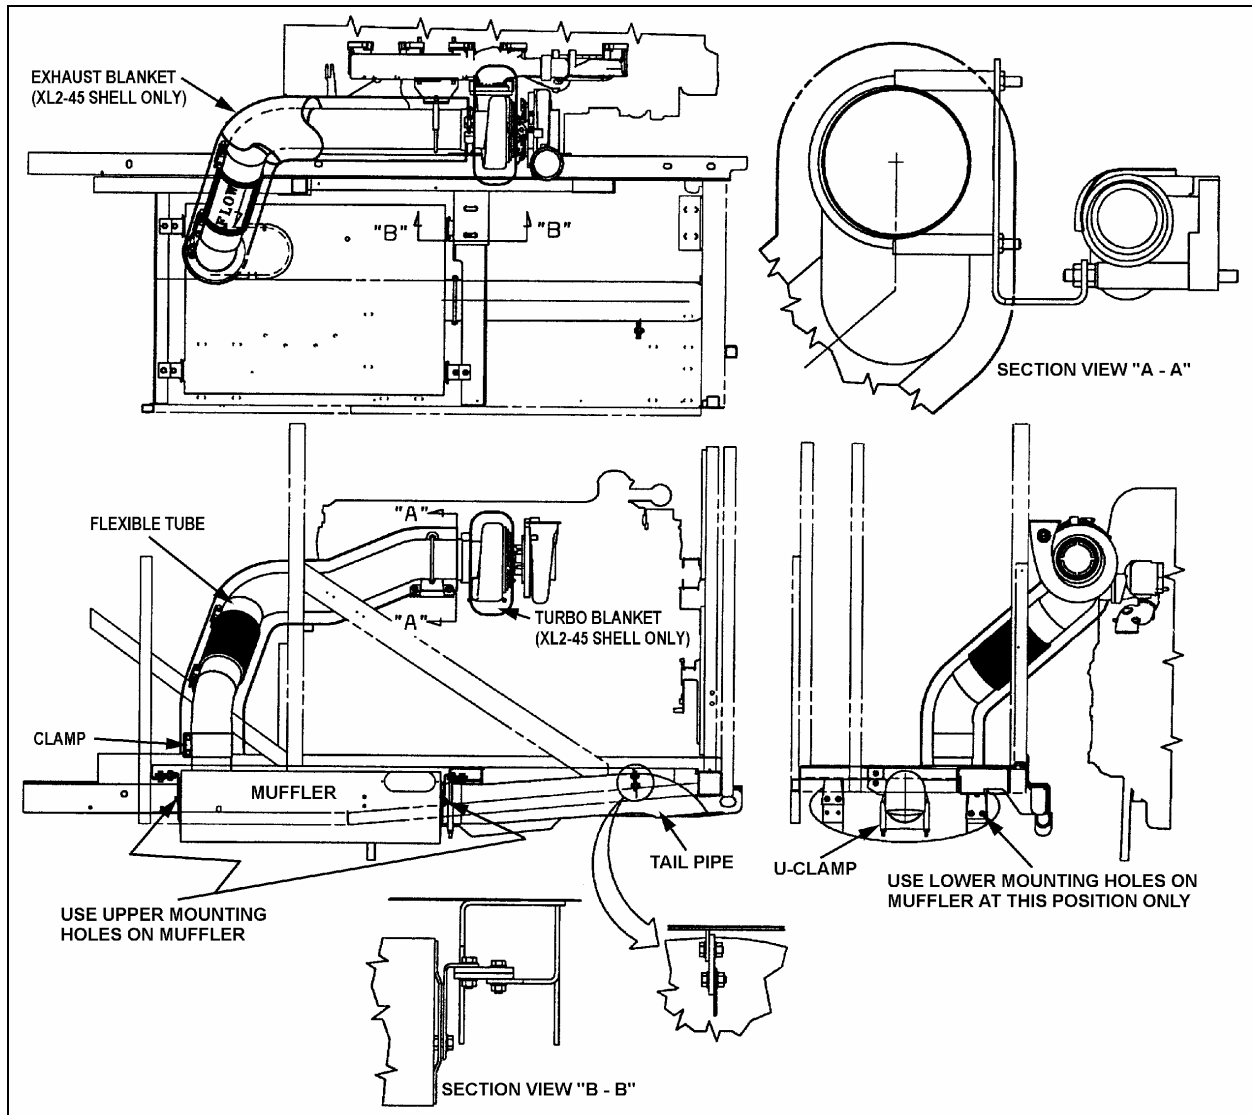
EXHAUST SYSTEM - XL2-45 (COACH & SHELL) INSTALLATION
